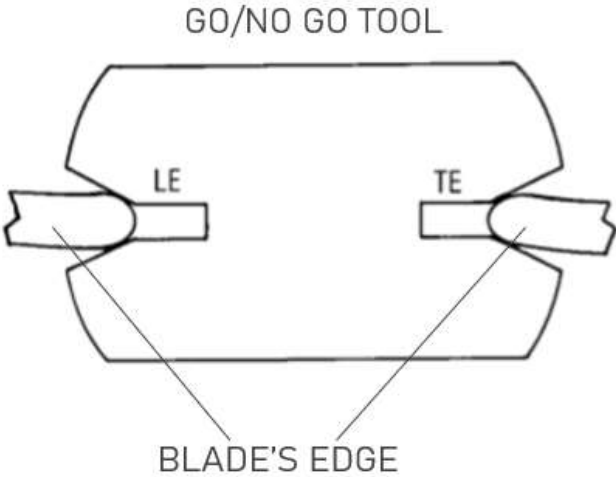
Go/No Go Tool for Edge Thickness Inspection
